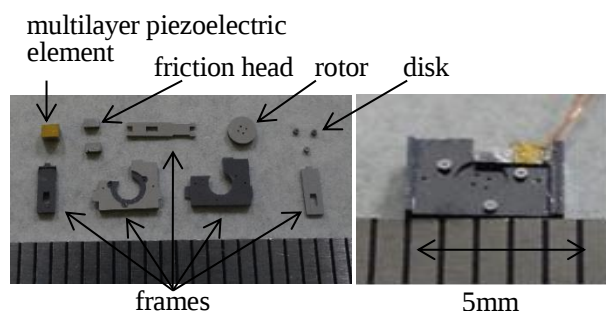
Fabricated components and the assembled friction drive MEMS rotary actuator
